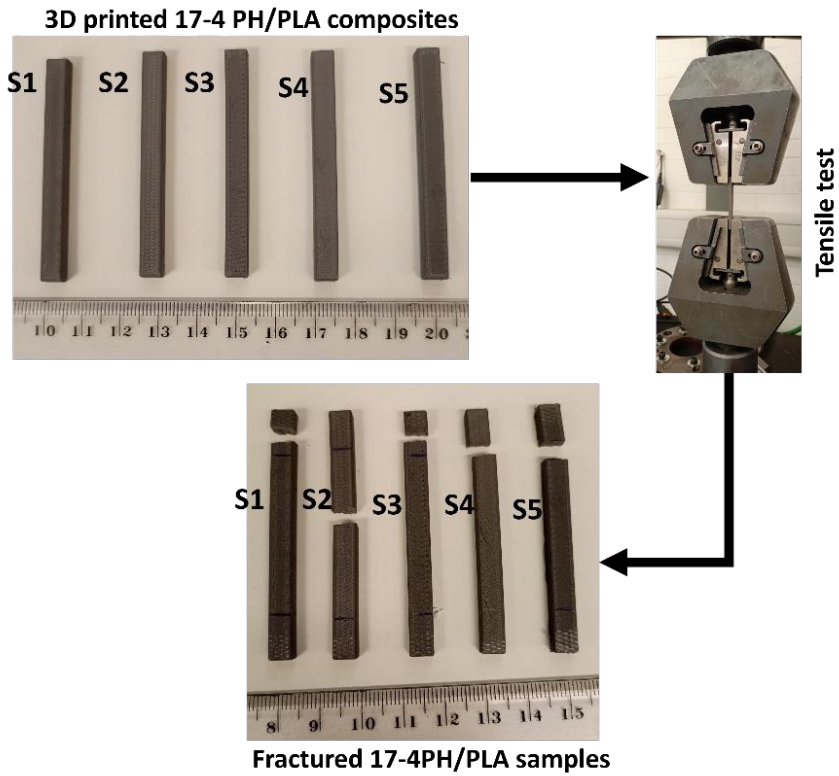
A picture of the 3D-printed 17-4PH/PLA composite before and after tensile testing
